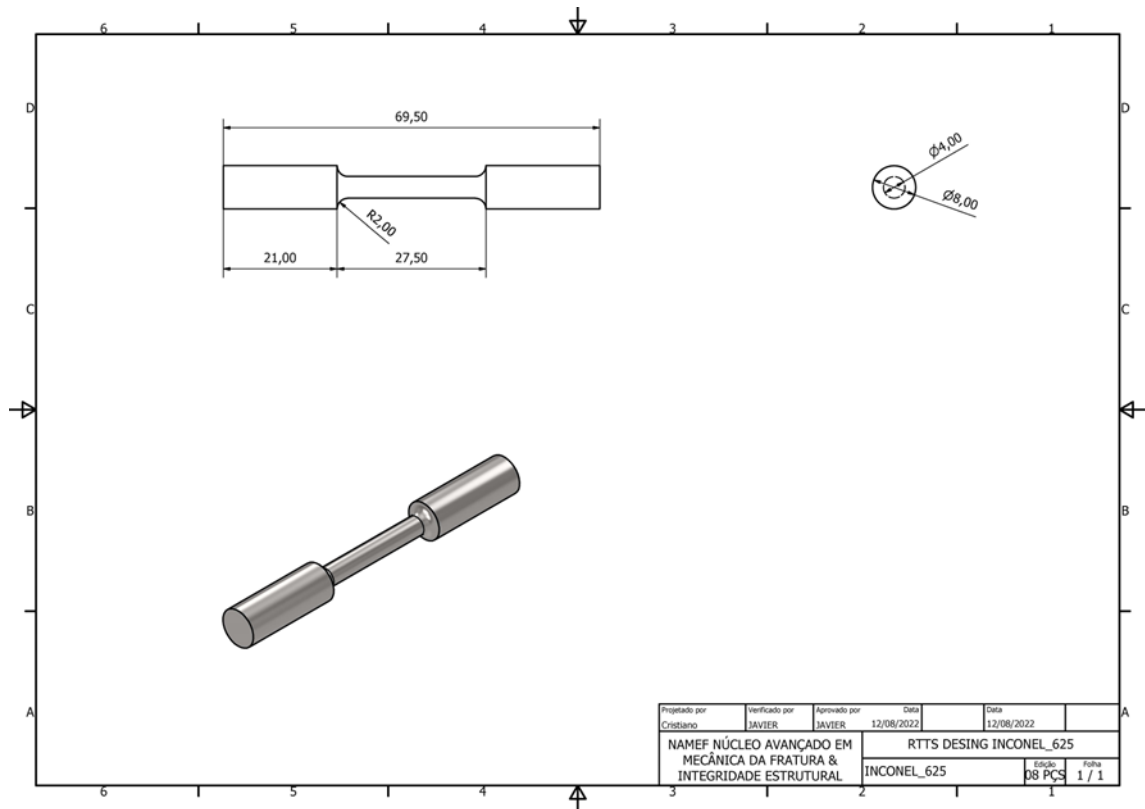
Geometry dimensions INCONEL 625 designated for conducting tensile tests.
